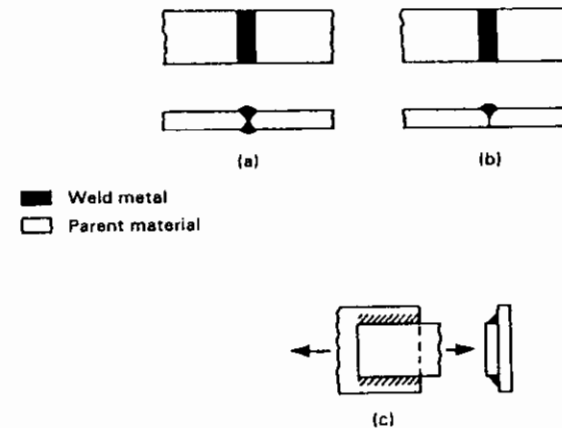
Basic types of weld: (a) full penetration; (b) partial penetration; (c) fillet weld [9].
